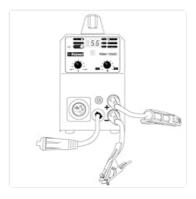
Diagram for Lift TIG welding setup.
